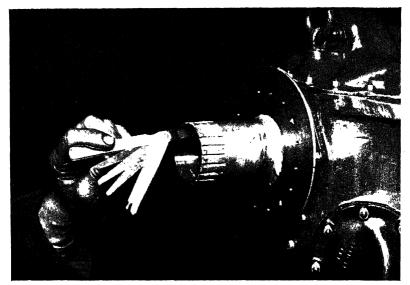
Checking clearance of airscrew hub keys (series 1). Ensure the boss is home on taper and not hanging up on keys.
